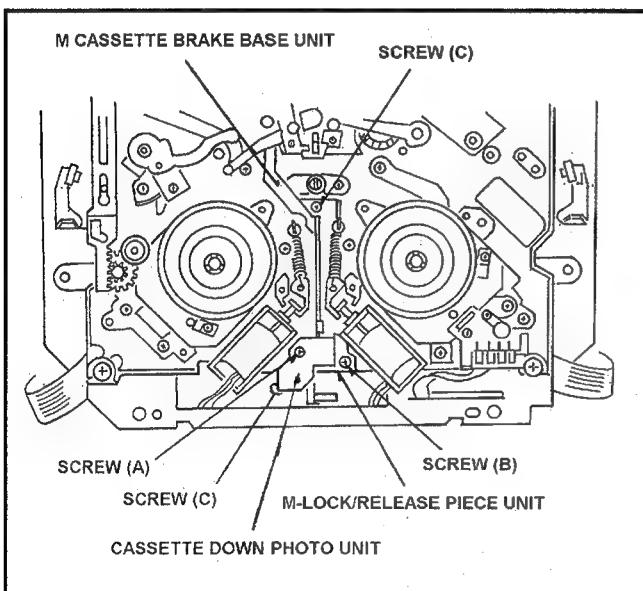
Removal of M Cassette Brake Base Unit
